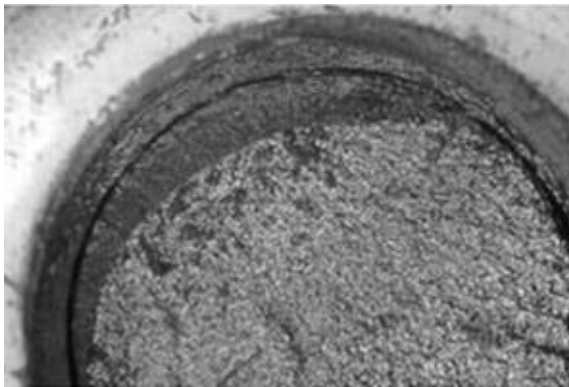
Fracture initiation from a half penny shaped 3.3 mm deep fatigue crack.
